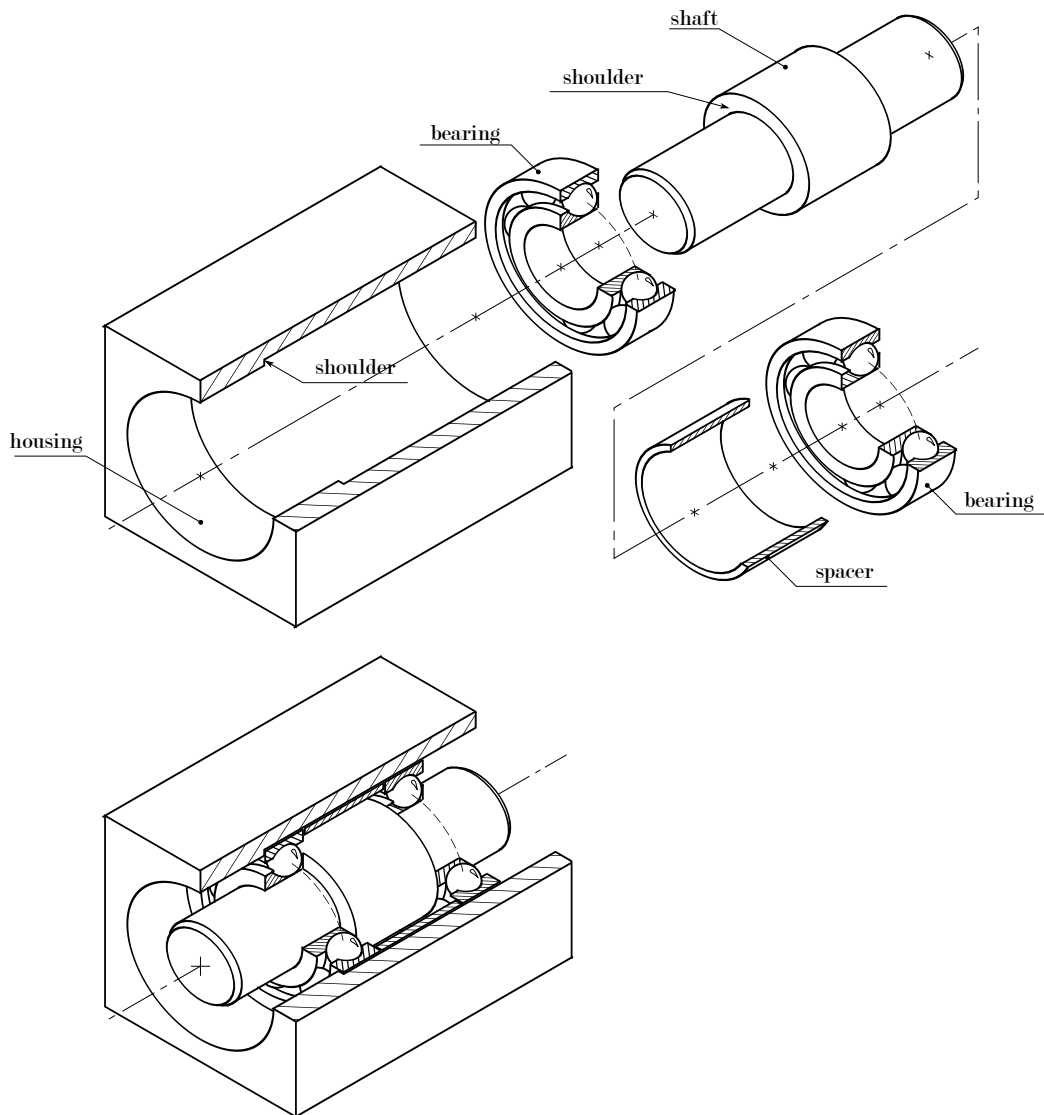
Schematic representation of a bearing assembly that realises a revolute joint
